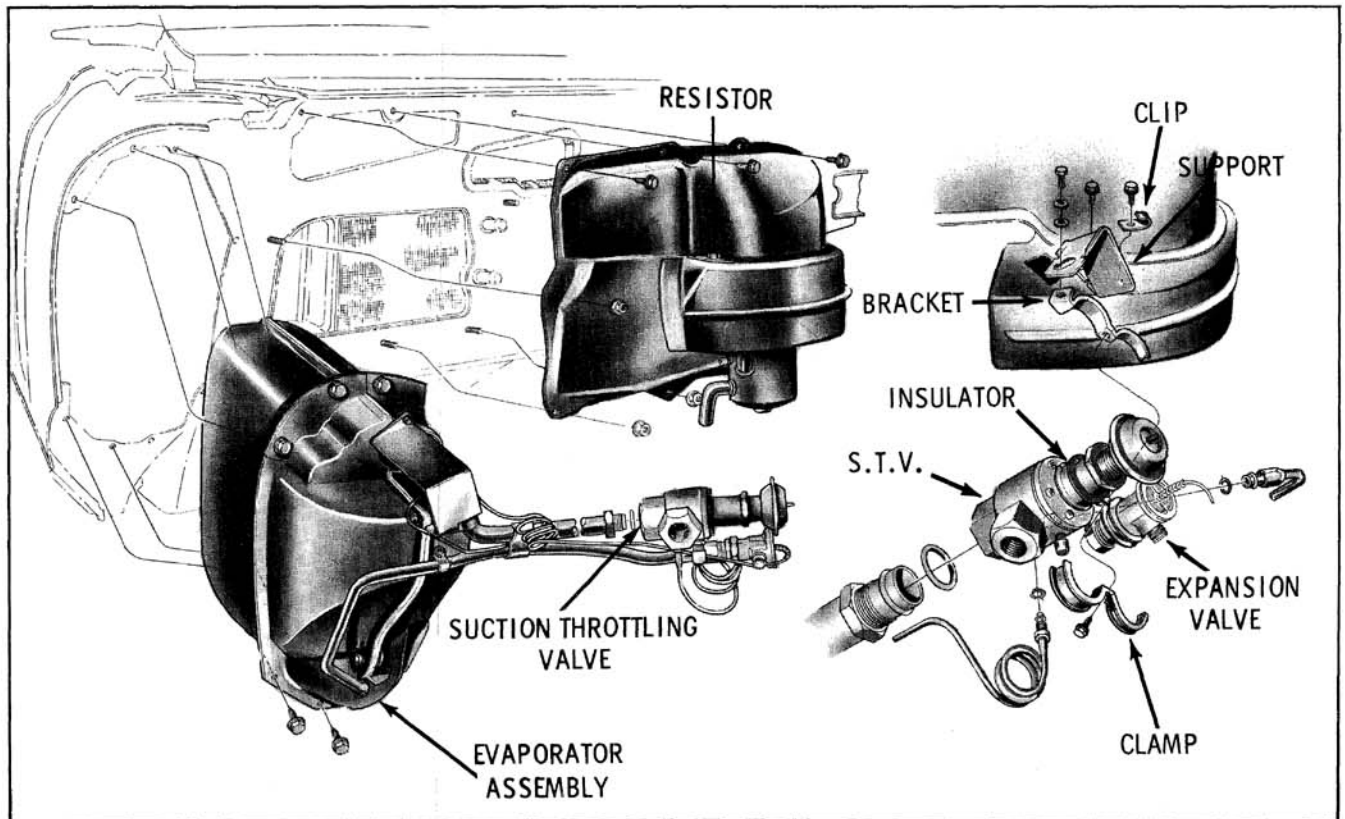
Blower Motor and Evaporator (33 through 38 Series)
